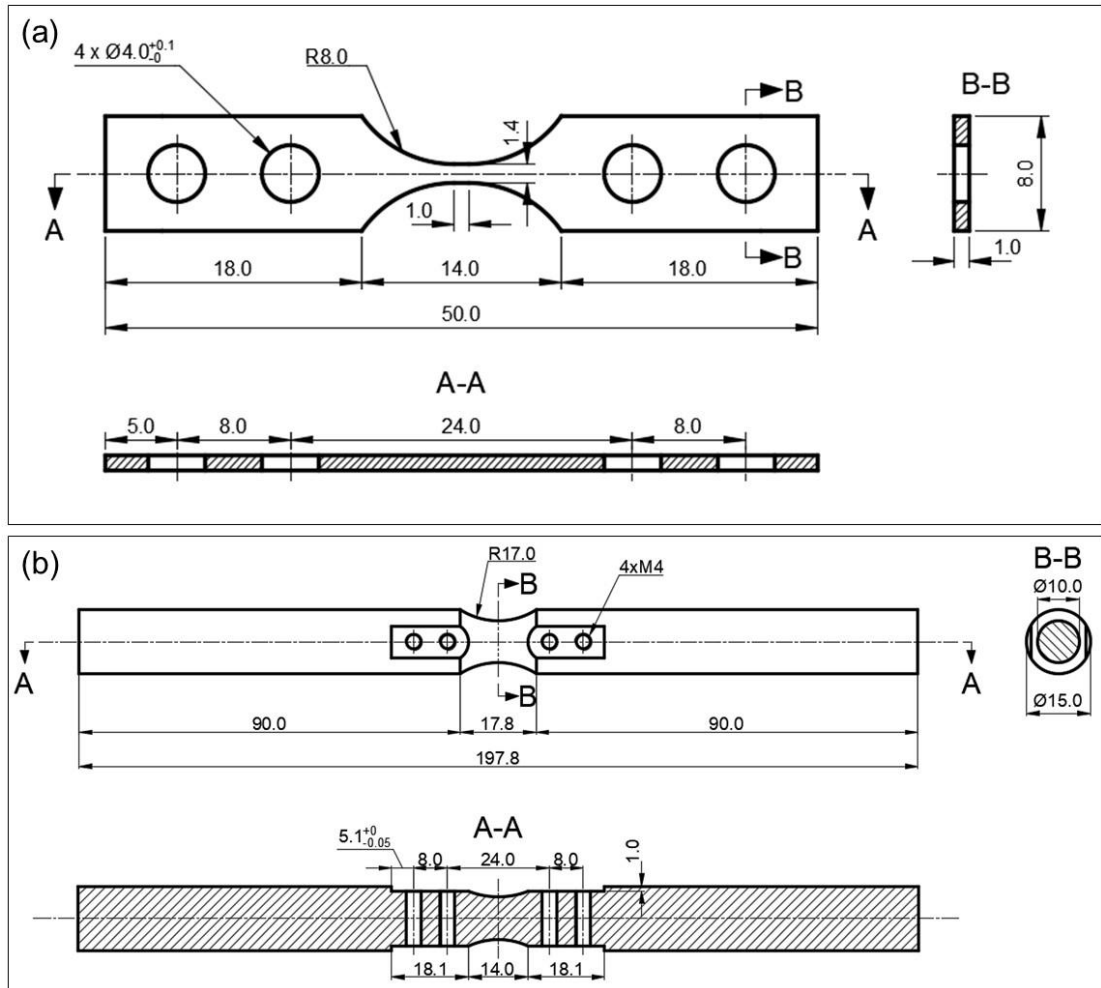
(a) A schematic sketch of the plate specimen geometry used for the fatigue tests (unit: mm). A jig shown in (b) was used to test samples taken from the plate specimens by rotating bending fatigue testing. The plate specimen was fastened on the jig by screws.
